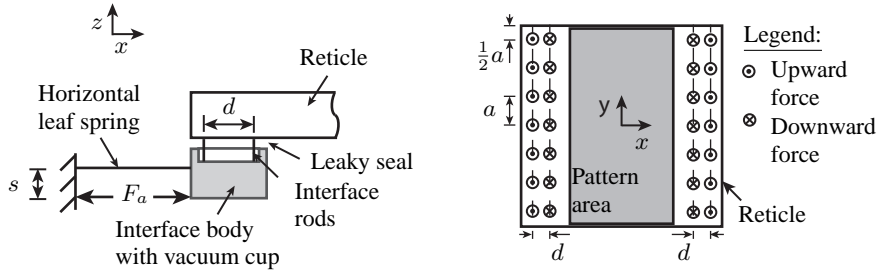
The identified moment generation mechanism. The left drawing shows a side view of the mechanism which translates the actuator force F_a into a bending moment on the reticle. The right drawing shows a top view of the photomask with the discrete push-pull force locations of the interface rods which are placed at a pitch a .
